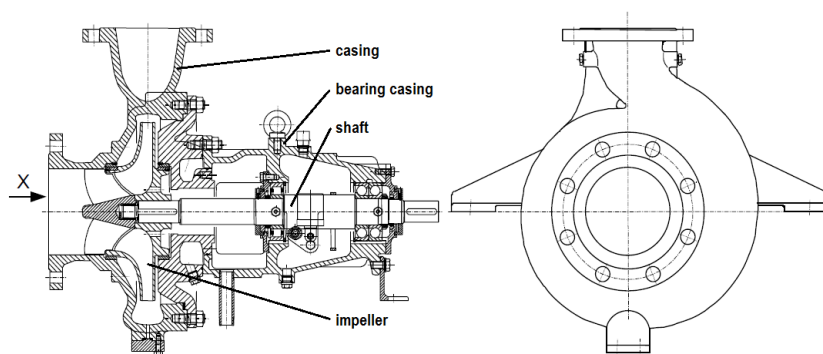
Single-stage volute pump with bearing frame, Sulzer Pumpen AG [6].
